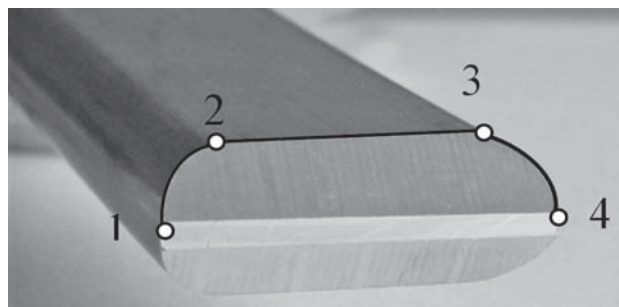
Diagram of section welding in steps: 1 Arc ignition, holding, 1 - 2 Welding of a curve, 2 - 3 Welding of a straight segment, 3 - 4 Welding of a curve, 4 Crater filling
